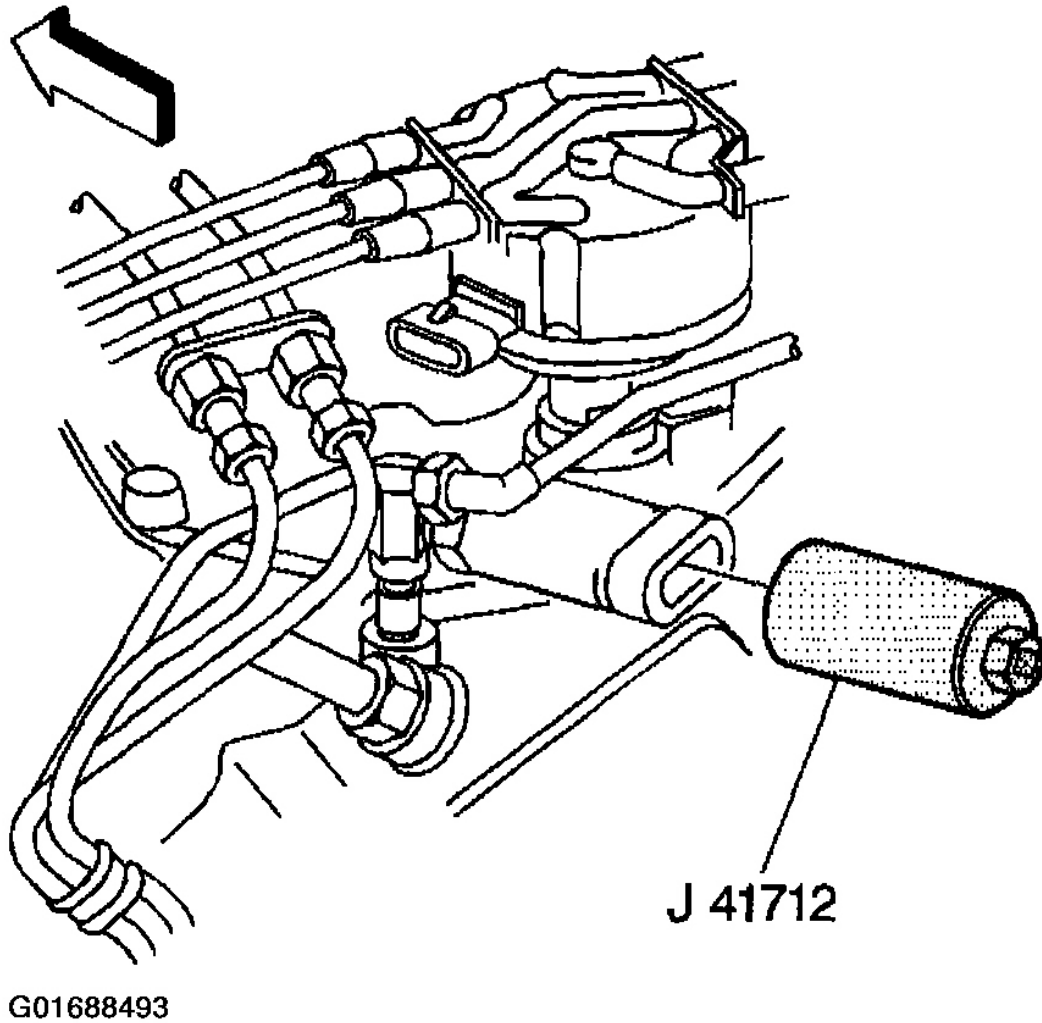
Installing Oil Pressure Sensor Using J 41712
